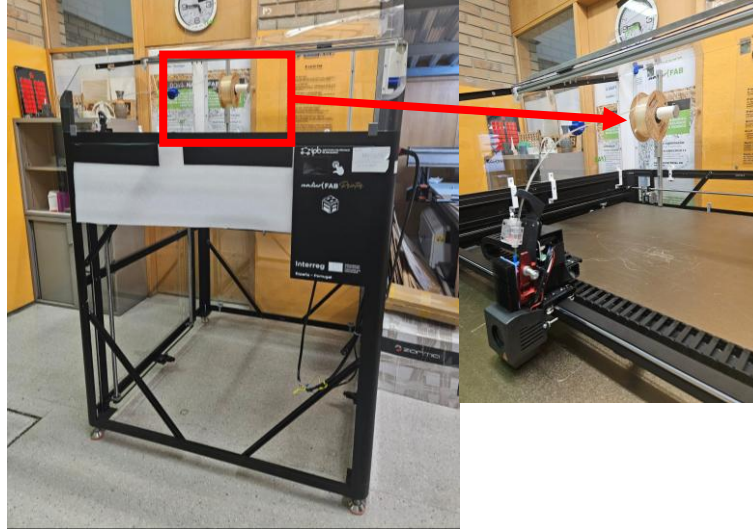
Custom-built FFF 3D printer used for printing PLA tensile specimens.
